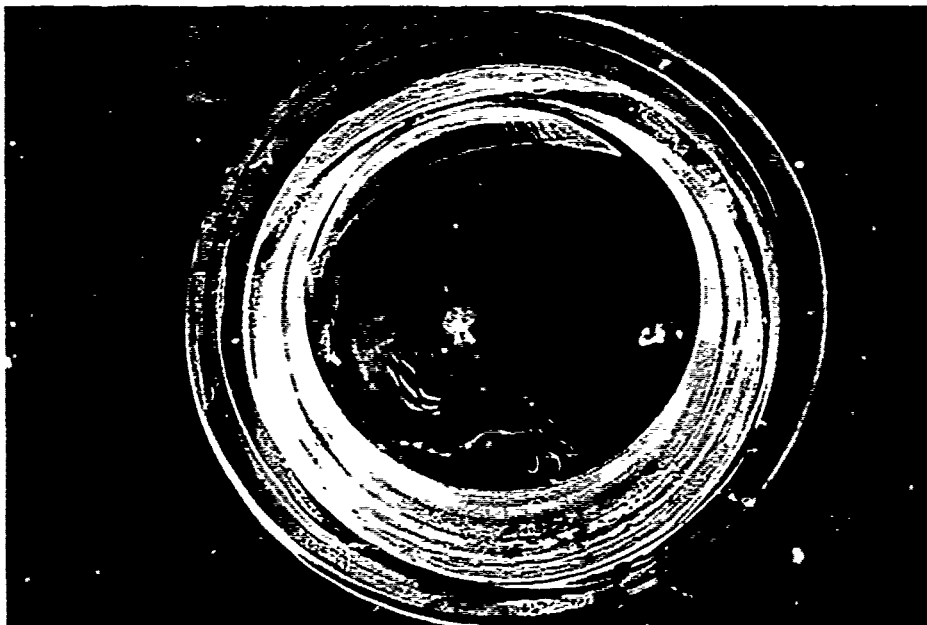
Extensive crazing and a major circumferential crack on the bearing surface of Type VI window Q after 139 hours of sustained pressure loading at 7,000 psi.
